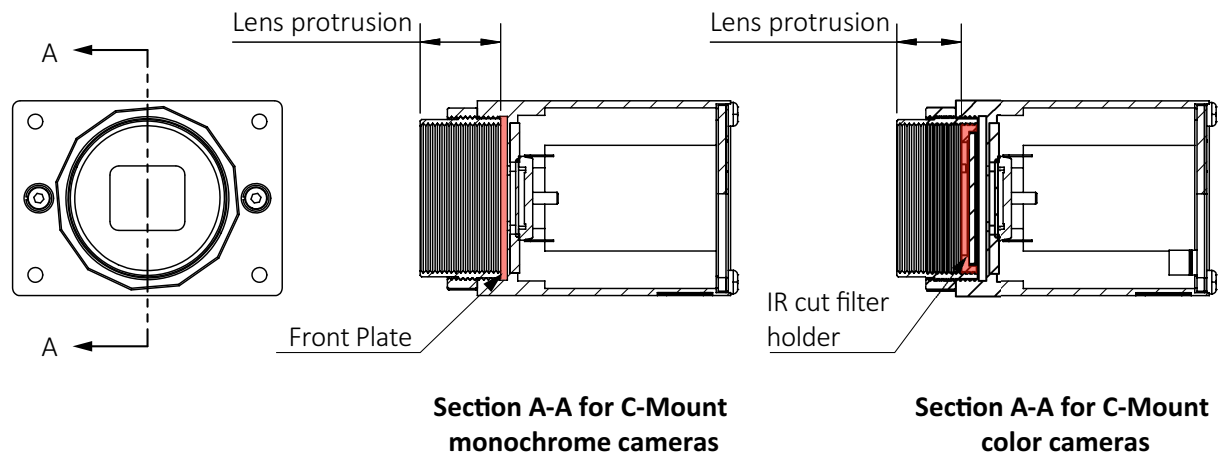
Cross section of typical Prosilica GC assembly with C-Mount
